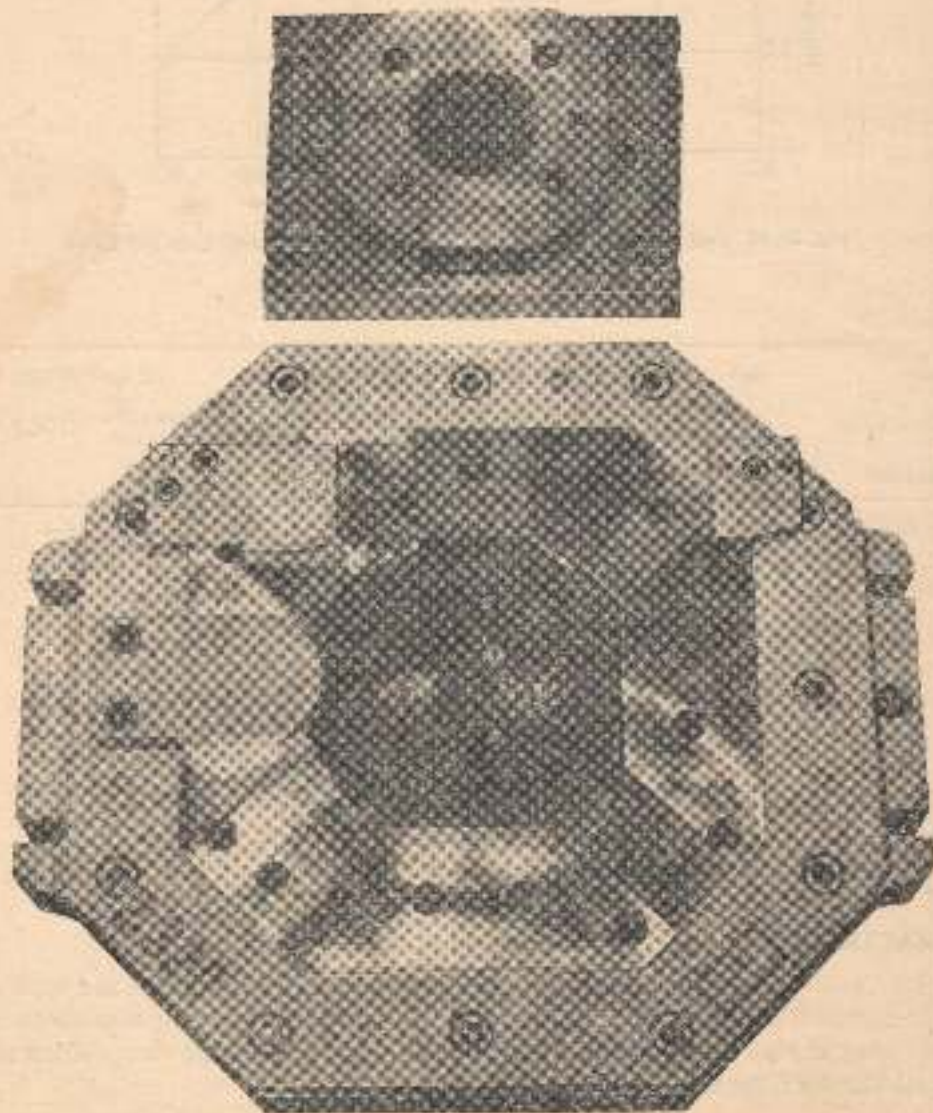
(a) Blanking die for dished tractor wheel blanks made of steel—ISO 45WCrV2
